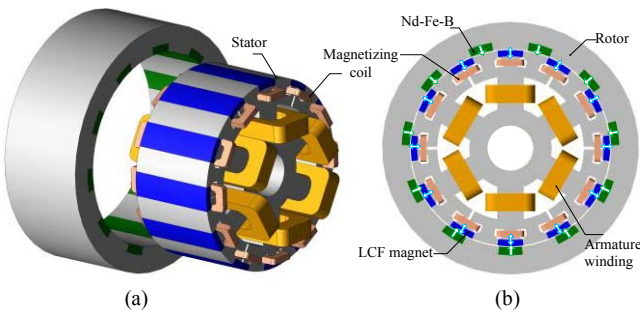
Proposed DSPM-VFMM. (a) Exploded view. (b) Cross-section.
